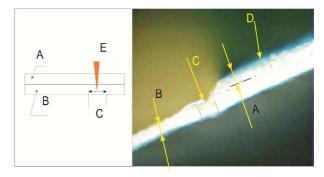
Incomplete cutting: A – label material; B – label board; C – action area of the blade; E – die cutting blade.
